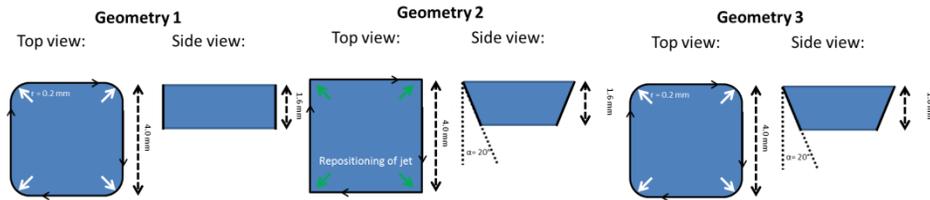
Geometry 1: Cutting geometry used for 2-axis cutting. Geometry 2: Cutting geometry used for cutting with a 2-axis system with clearance angle. Geometry 3: Cutting with 5 axes.
